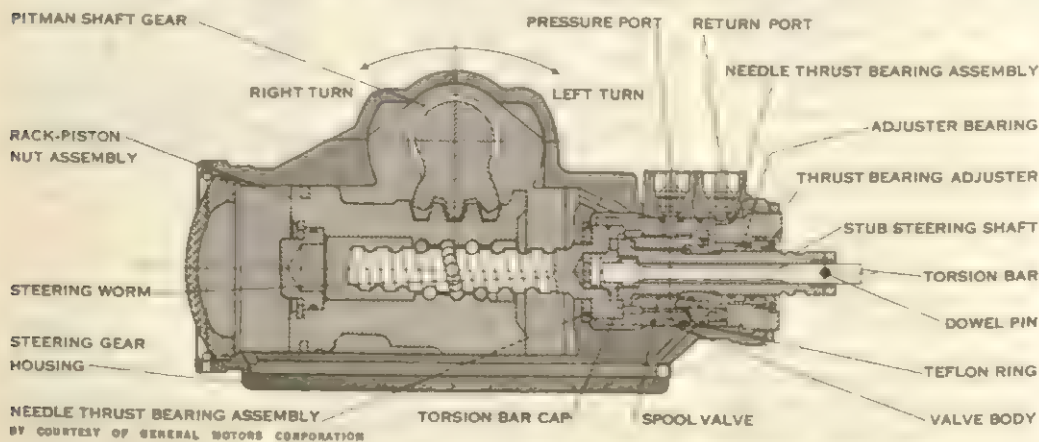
CROSS SECTION OF INTEGRAL POWER STEERING GEAR
